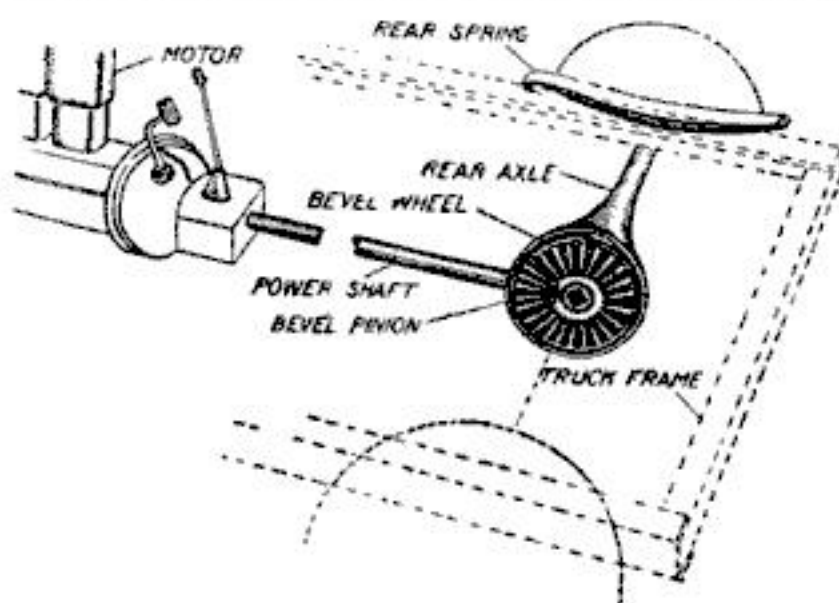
Bevel drive. The bevel-pinion on the end of the shaft meshes with a large bevel-wheel in the rear
